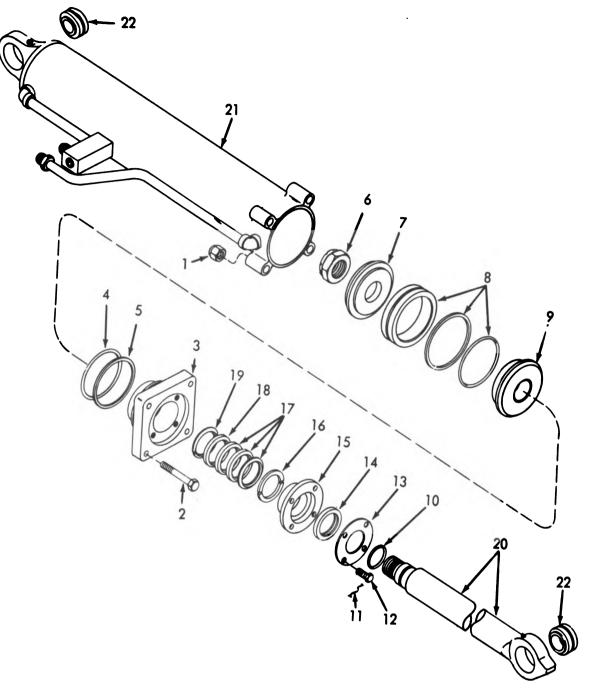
Steering hydraulic cylinder, removal, disassembly, reassembly and installation (sheet 1 of 2).
